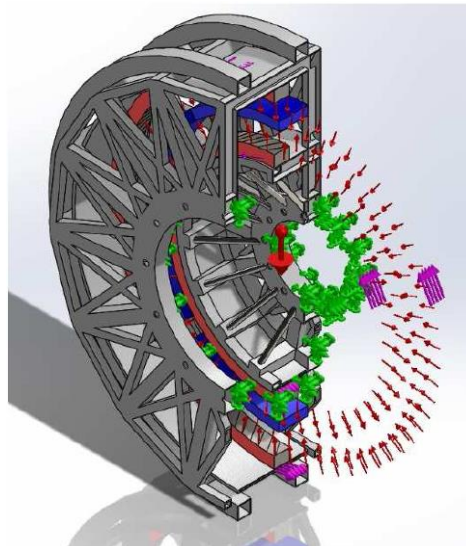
Mechanical structure for the original design of the double claw pole machine [5].
